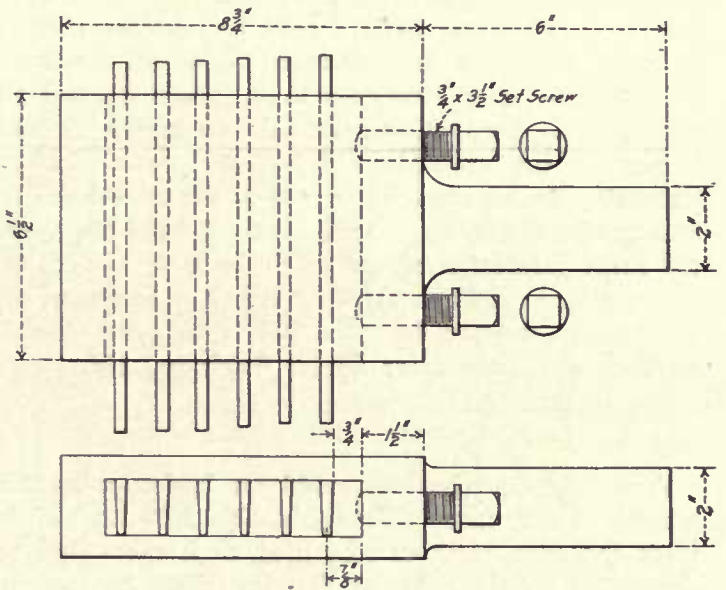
Gang Tool for Cutting Apart Piston Rings.
